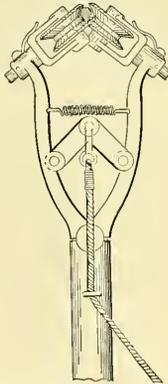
,340.—TROLLEY POLE WITH LOCKING WHEELS.
